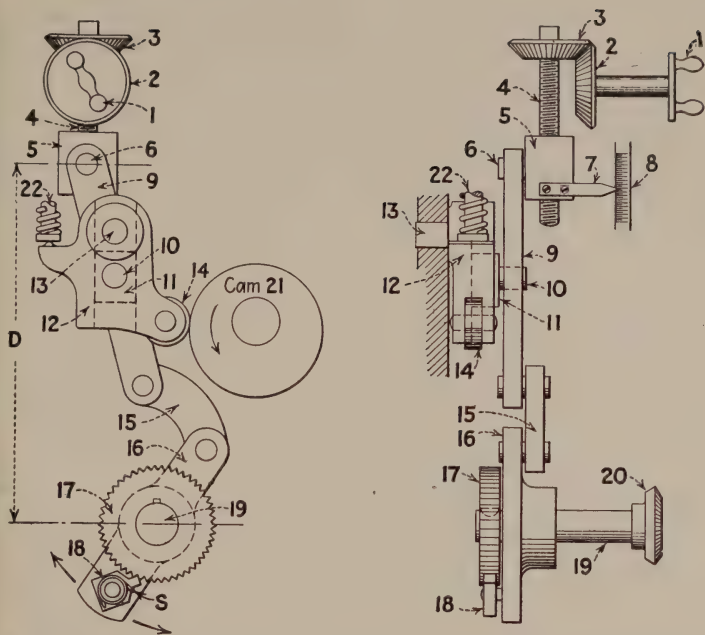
Shaper feed mechanism (operated by a cam). The feed handle (1) controls the amount of feed. Turning (1) turns the bevel gears (2) and (3) and the screw (4). The screw (4) threads into trunnion block (5) and adjusts it vertically. The block (5) carries the stud (6), the feed arm (9), the stud (10), and the block (11). Therefore, adjusting (5) serves to move the feed-rocker block (11) towards or away from the *pivot center* of the feed rocker (12) and thus changes the amount of feed as explained in paragraph 79. The pointer (7) on graduations (8) shows the amount of feed in thousandths of an inch.
